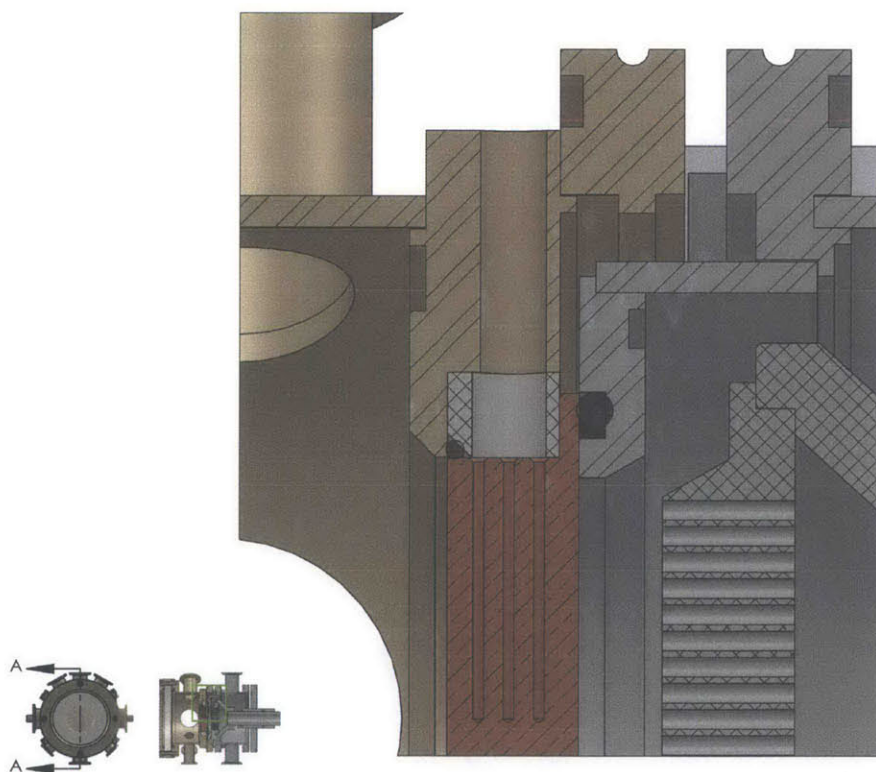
Seal detail. Steam-side is isolated by a bevel seal o-ring, while coolant-side surface is isolated with a face seal. Middle portion of block is accessible through thermowell port.
